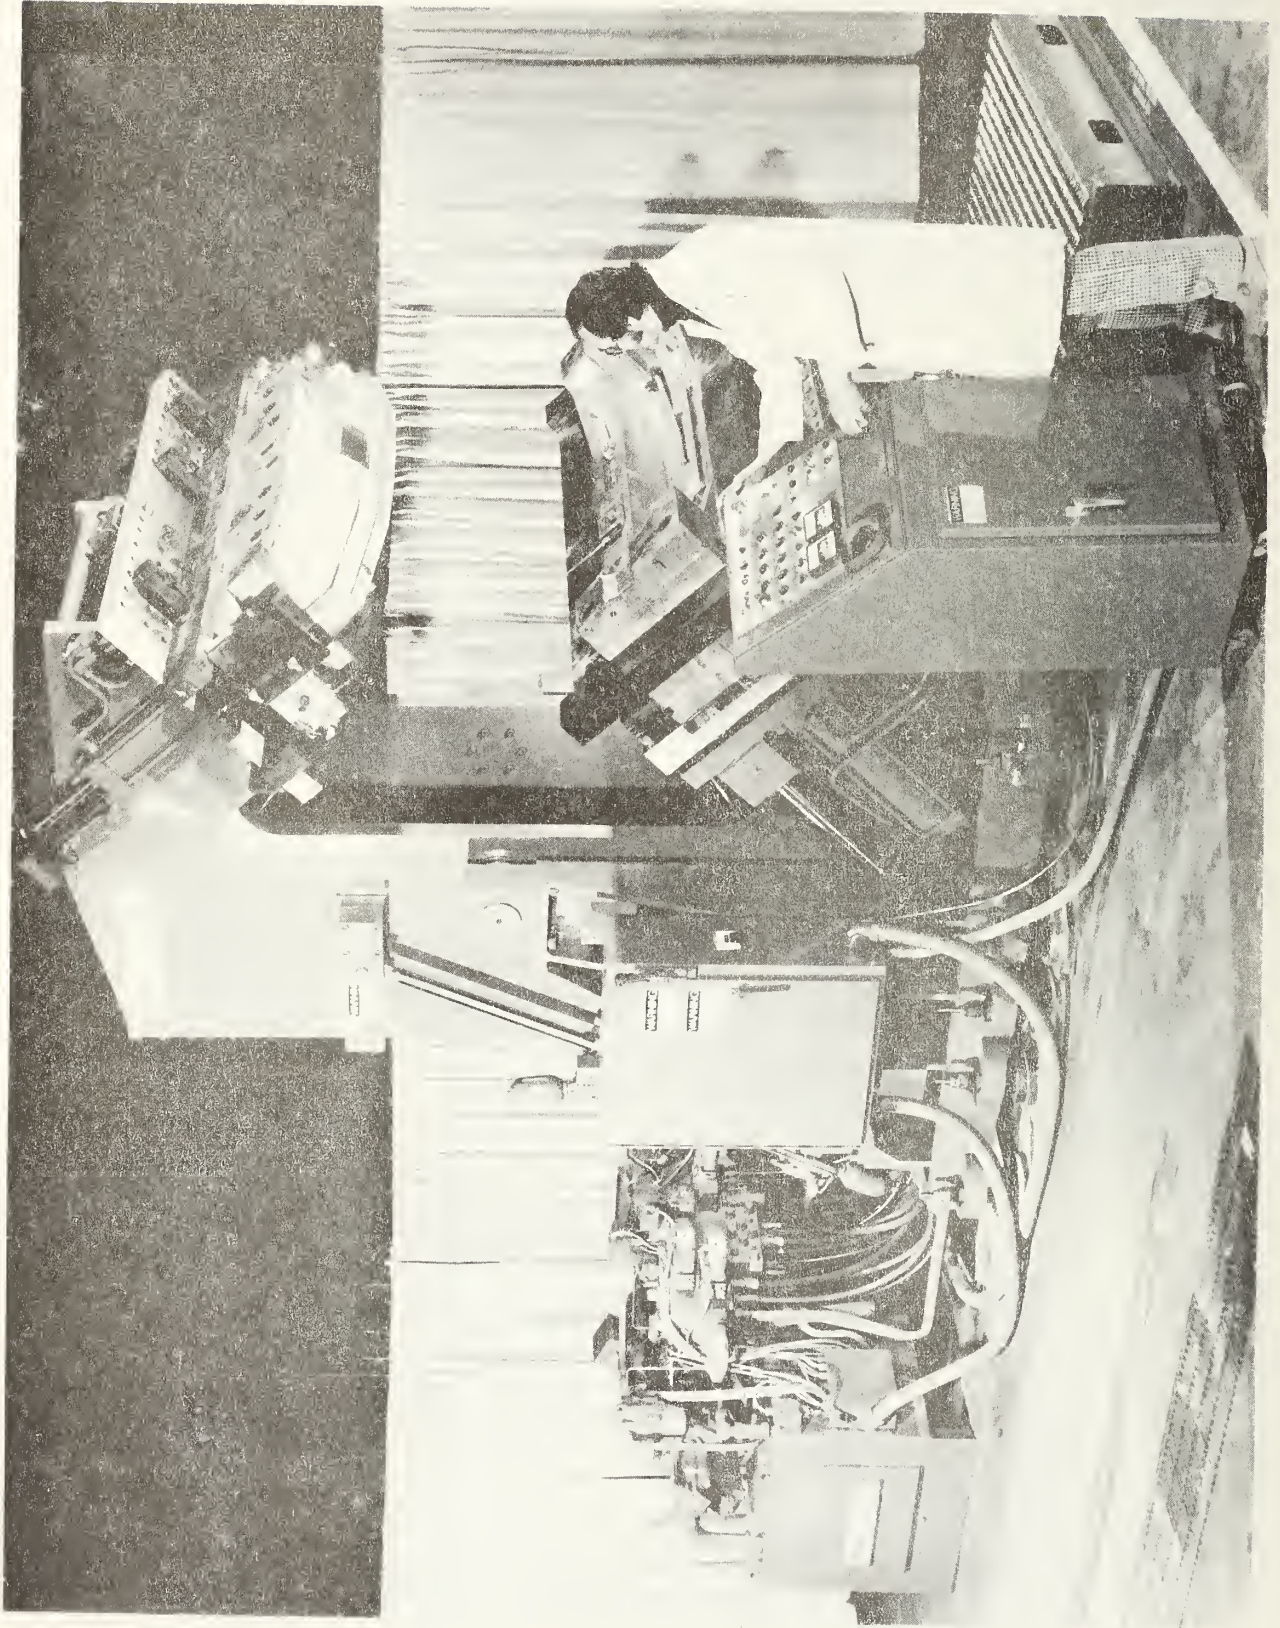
RIM MACHINERY FOR MAKING BUMPERS
